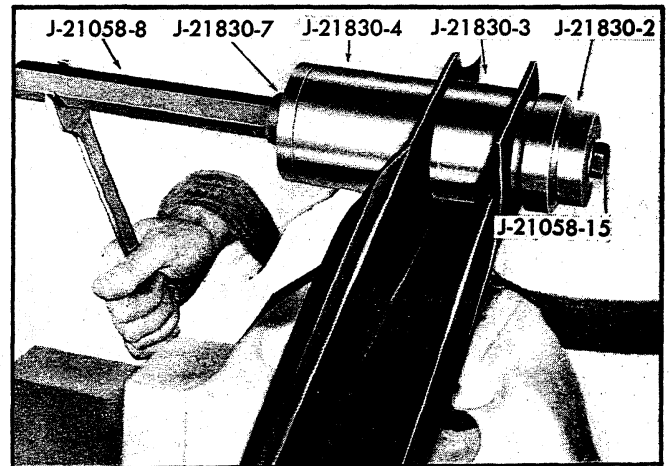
Lower Control Arm Rear Bushing Installation (Chevrolet)
